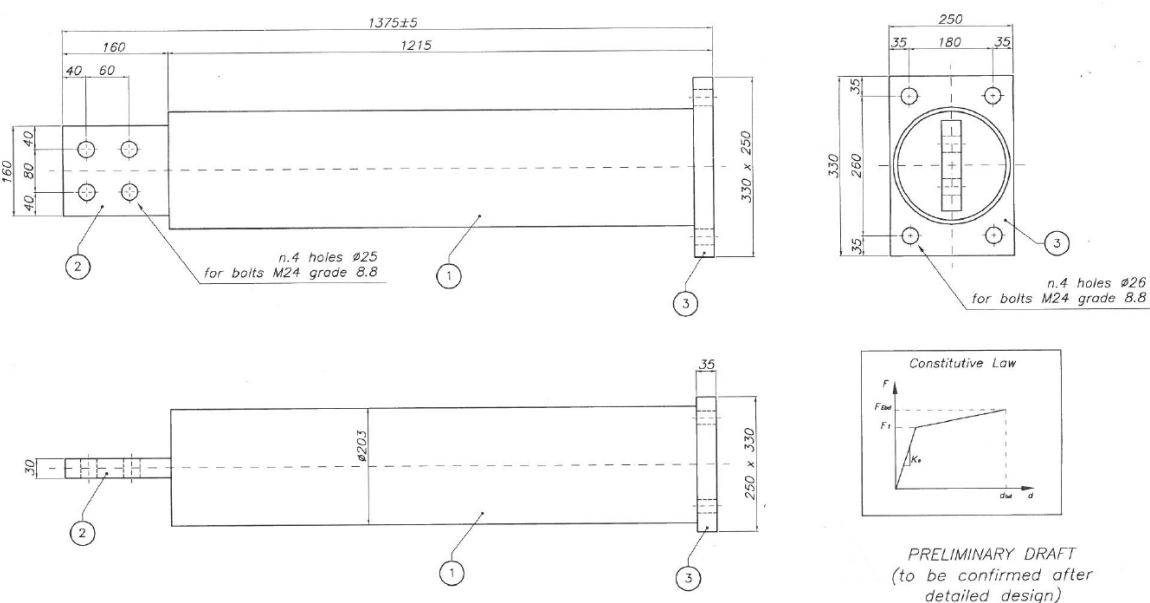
Geometrical properties of steel hysteretic BRAD type dampers
